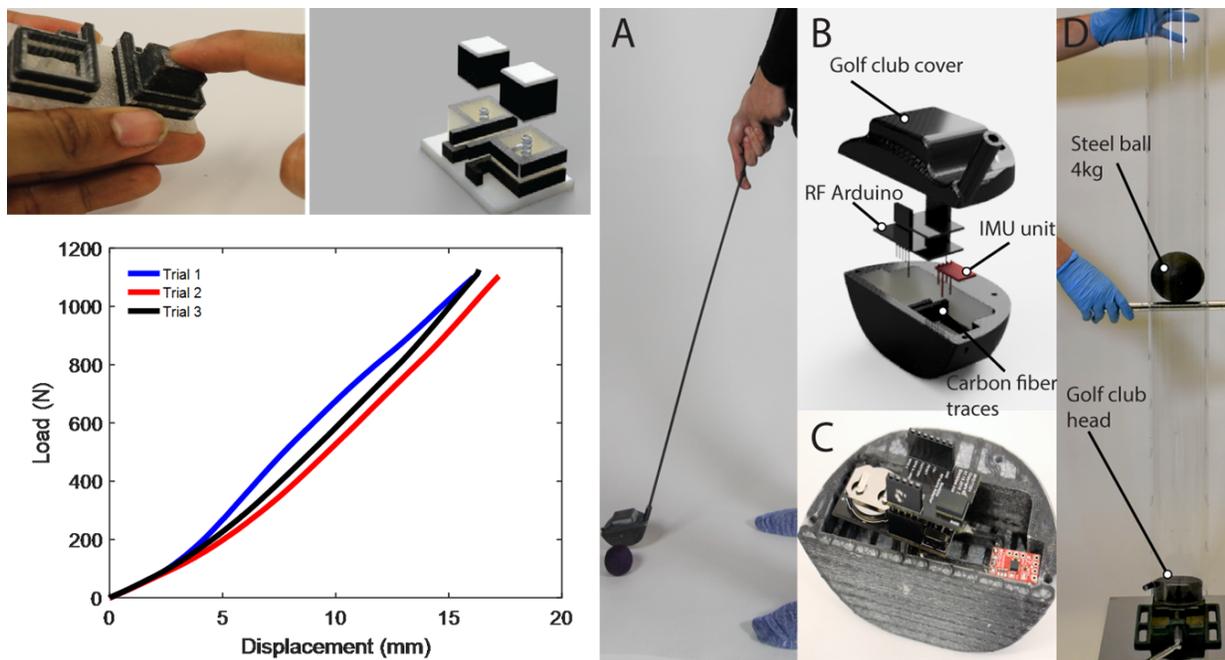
a) Shows the golf club with a user b) Shows the exploded view of golf club with RFduino and accelerometer c) Shows the top view of the fabricated sample d) Shows the drop ball impact test of the golf club head. e) Bike Handle Bar Strength Testing f) Shows the fabricated tactile buttons with two fiber traces embedded with a nylon layer in the middle. g) Shows the caps that go with the buttons which are also fabricated with carbon fiber
